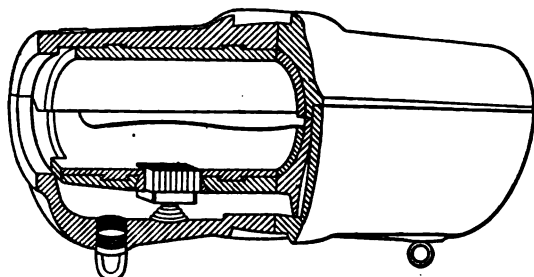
SEC. 7e.—Dodge capillary self-oiling bearing. (Courtesy of Machinery.)
